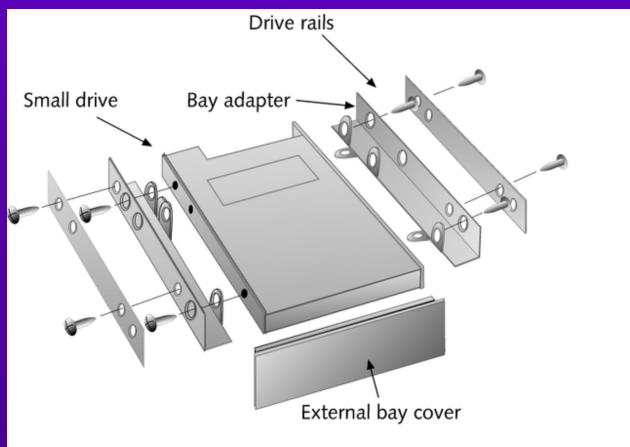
Use a universal bay kit to make the drive fit the bay
